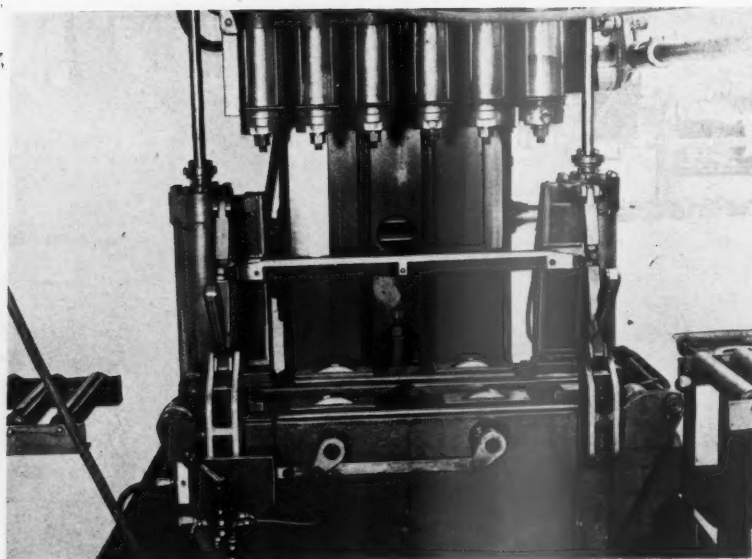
The work-holding fixture on the machine for fine boring the cylinder bores.
